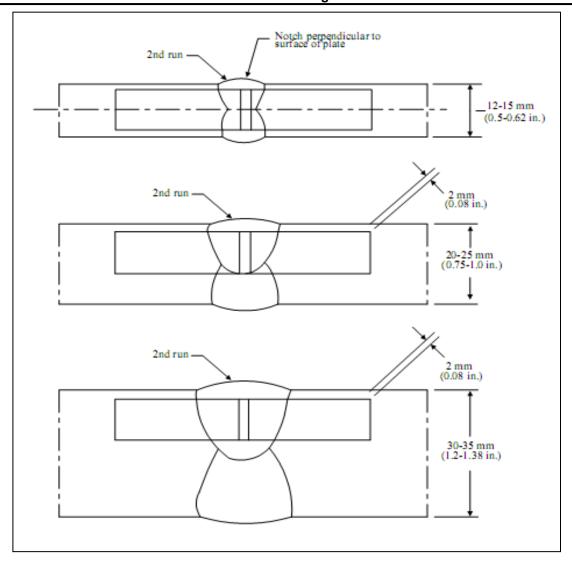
Butt-Weld Impact Specimen Location for Submerged and Gas-Metal Arc Welding – Two-run Technique
